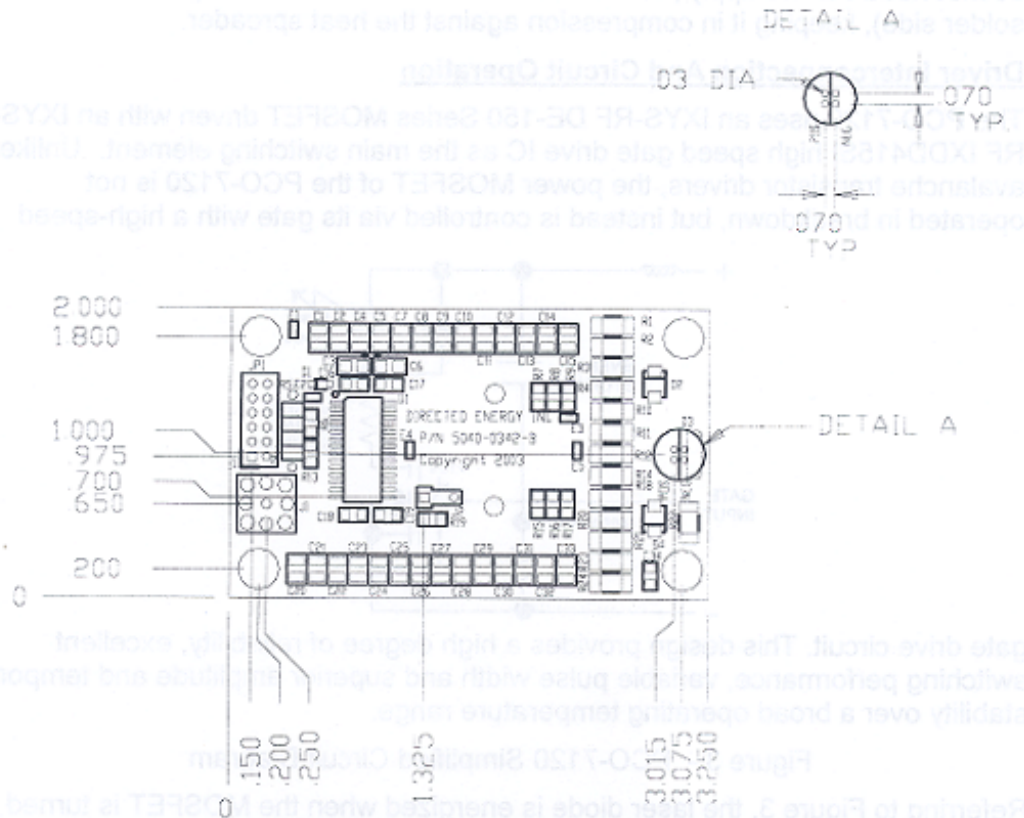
A – PCO-7120 Dimensional Drawing – Circuit Board Only
